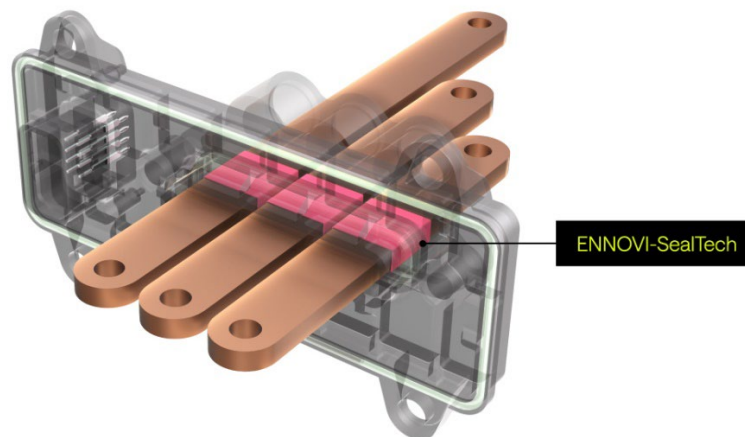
ENNOVI-SealTech: Integrated busbar sealing with injection moulding, eliminating secondary operations
